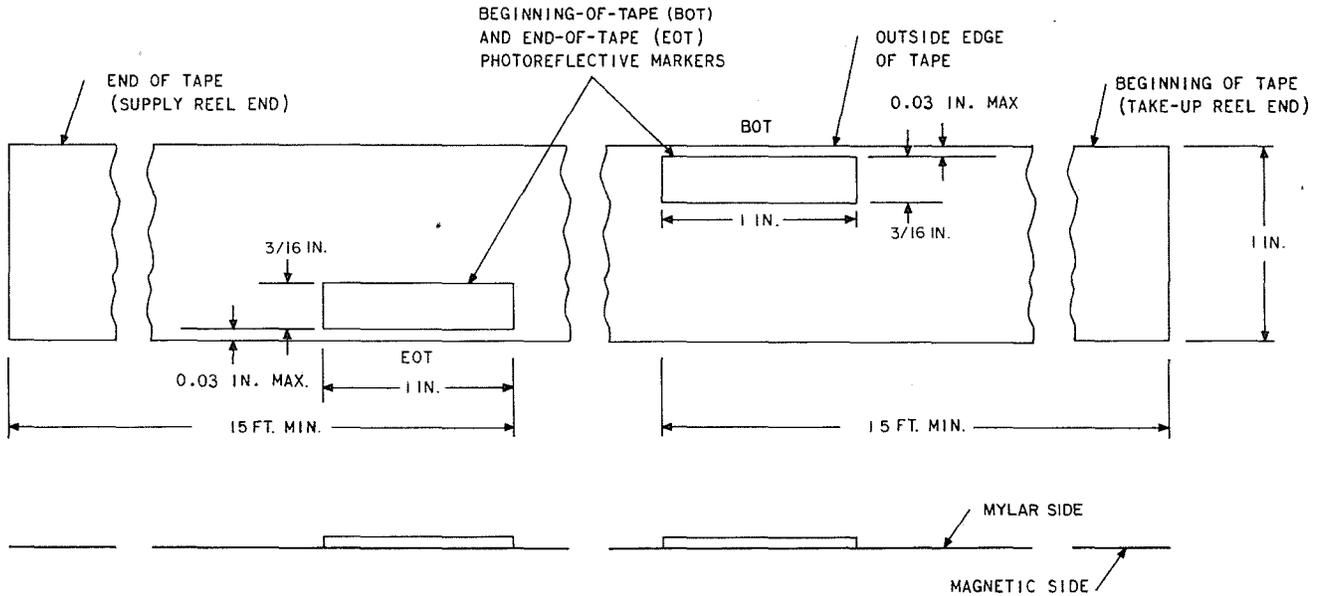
Photorefective Tape Marker Placement on 1-Inch Magnetic Tape
